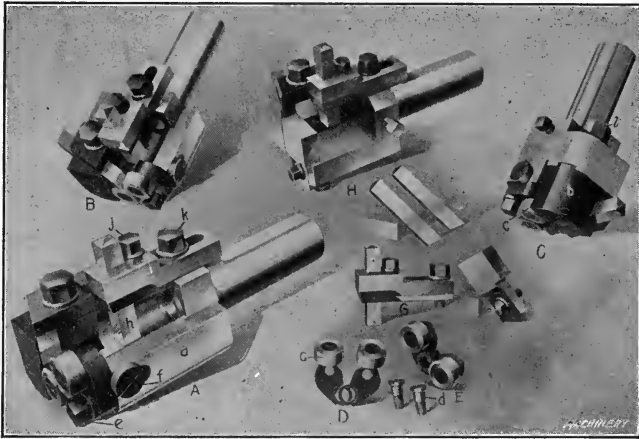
Group of Over-cut Box-tools used on the "Acme" Multiple-spindle Automatic Screw Machines
